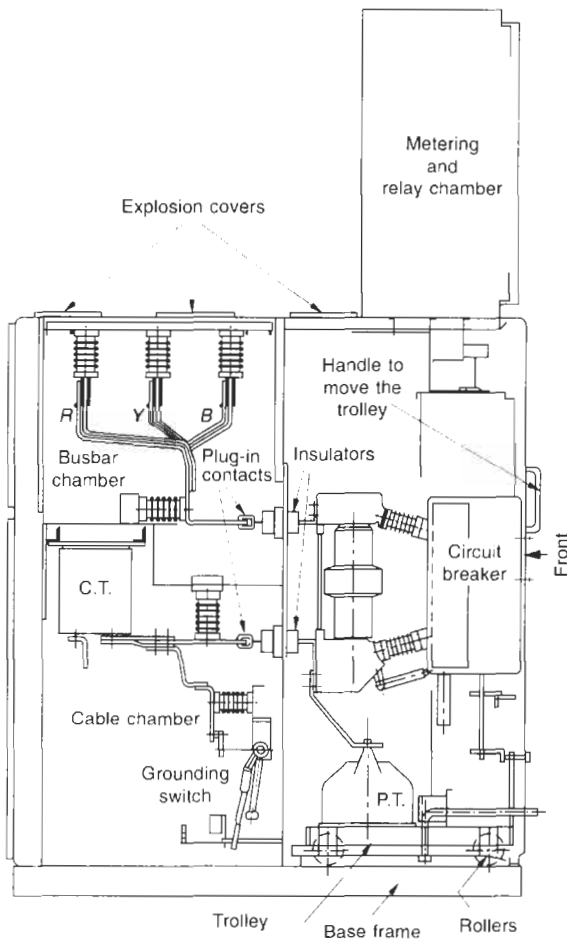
General arrangement of a 7.2–36 kV vacuum circuit breaker in a housing (Courtesy: Siemens)
